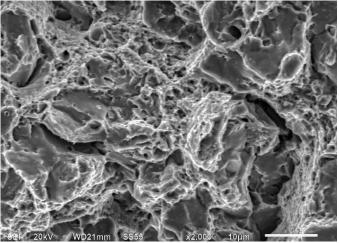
2000X Fracture 2 – Mixed Mode Fracture
